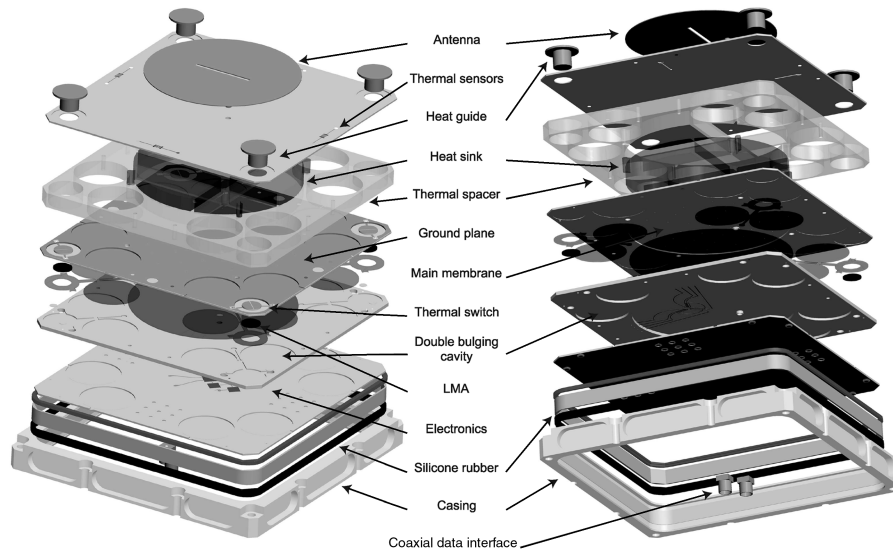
Exploded front and back view of the module including mounting frame and silicone rubber gaskets.
